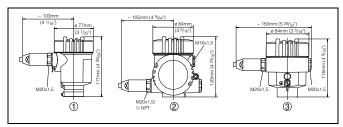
Housing versions in protection IP 66/IP 68, 1 bar with integrated indicating and adjustment module the housing is 9 mm (1 /₆₄") higher
